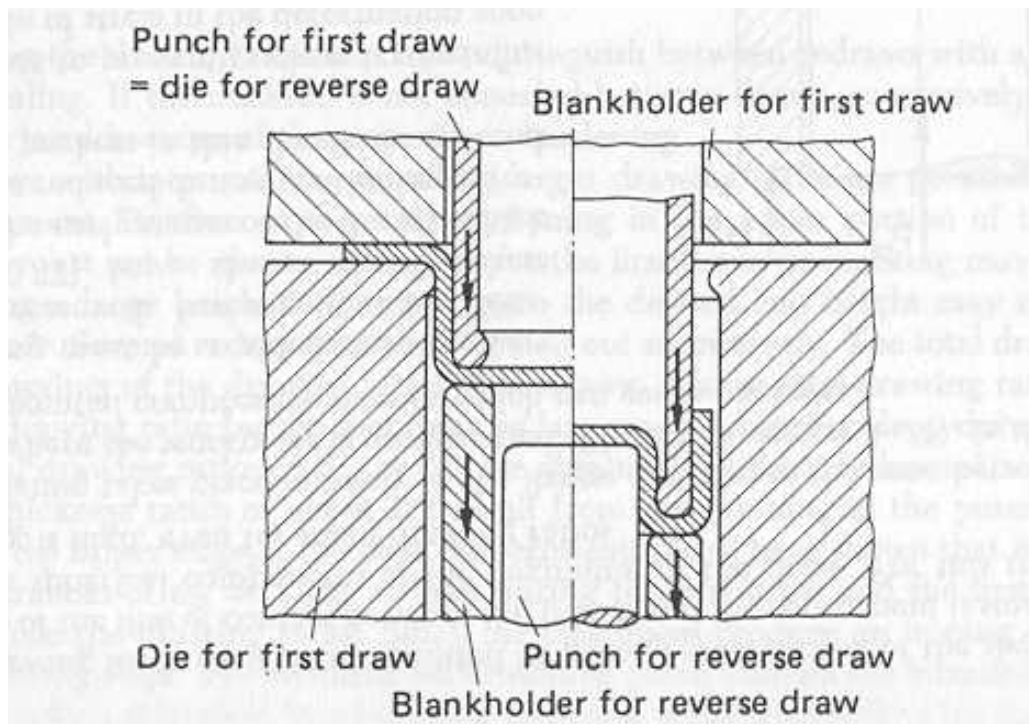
Reverse deep-drawing of seamless tubes. On the left it is displayed the configuration before drawing, while on the right is that during the operation.
